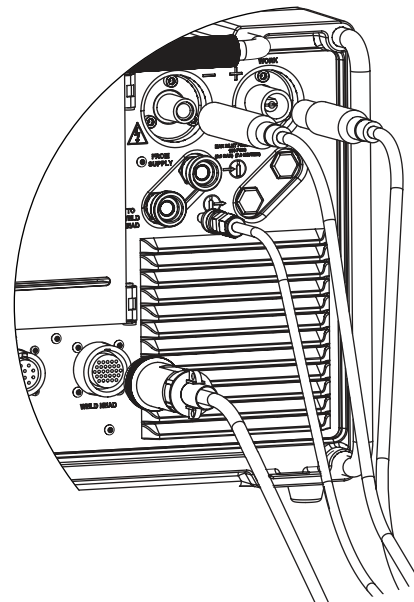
Connecting the Weld Head Assembly to the Power Supply
